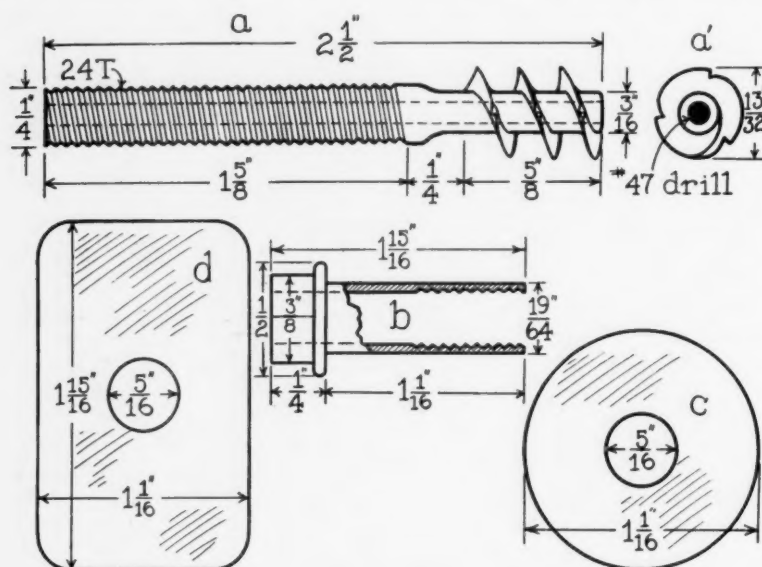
Lag-screw assemblage with measurements. The washer to be used beneath the sleeve nut should be of the same material as the lag-screw. (a and a') Lag-screw. (b) Telescoping sleeve nut. (c) Round washer. (d) Larger washer that can be molded.
